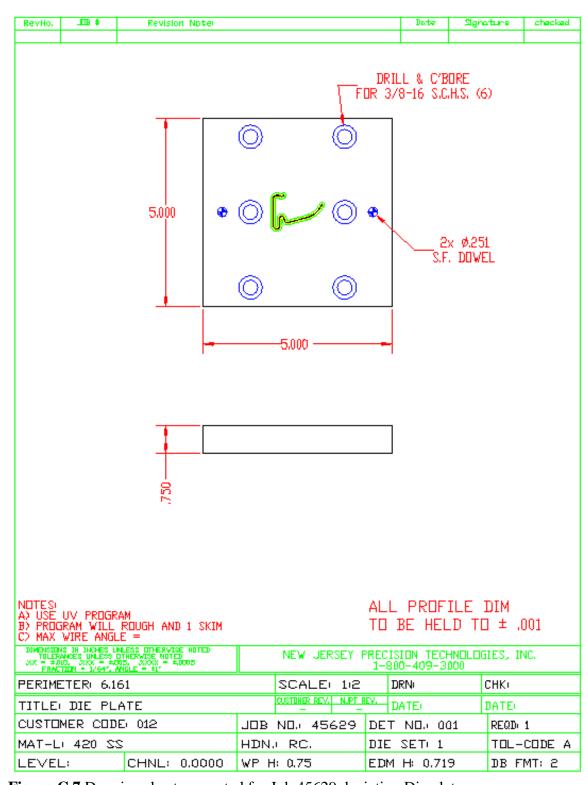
Drawing sheet generated for Job 45629 depicting Die plate.
